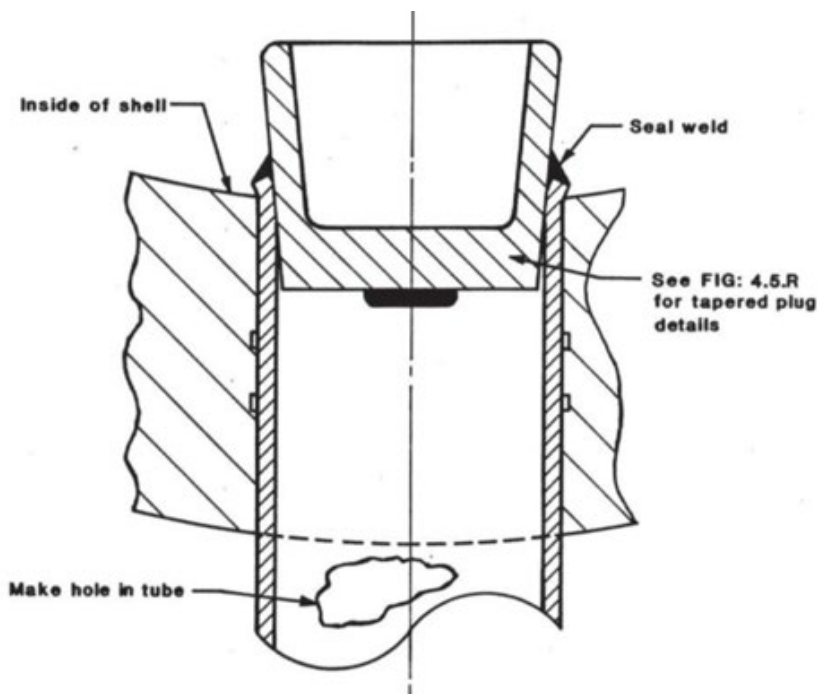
Tapered plug in a drum that does not have counter bored tube holes.
